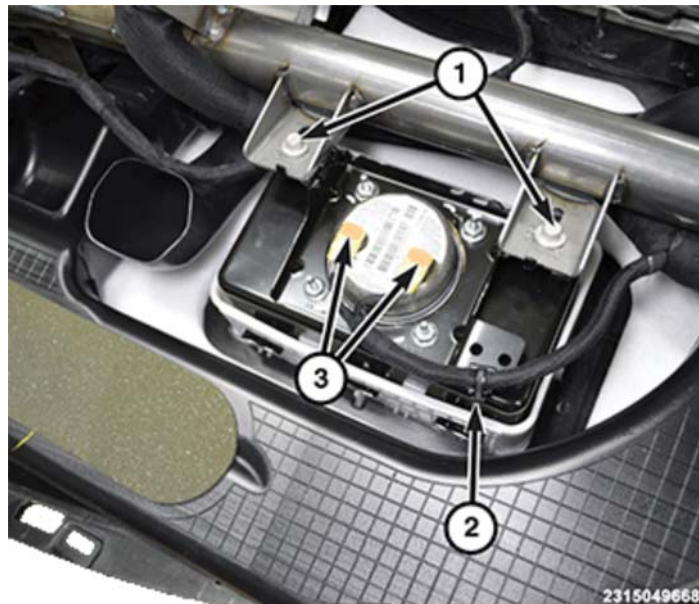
Passenger Airbag Bolts, Wire Harness & Connectors
